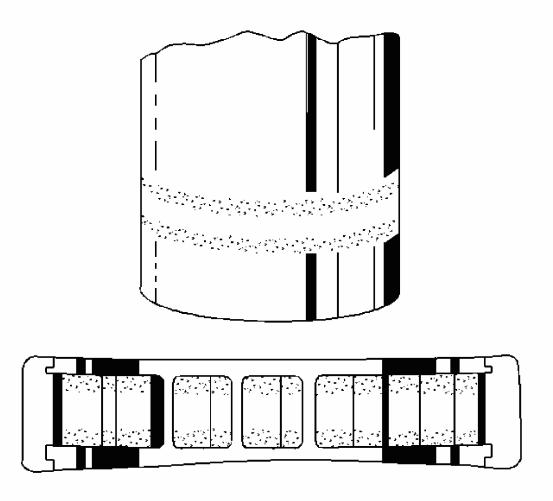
Identifying Double Edge Pitting Courtesy of GENERAL MOTORS CORP.
